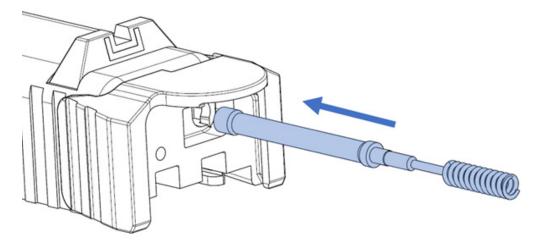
Direction to follow to insert the RISCpro Extractor Plunger Assembly.
